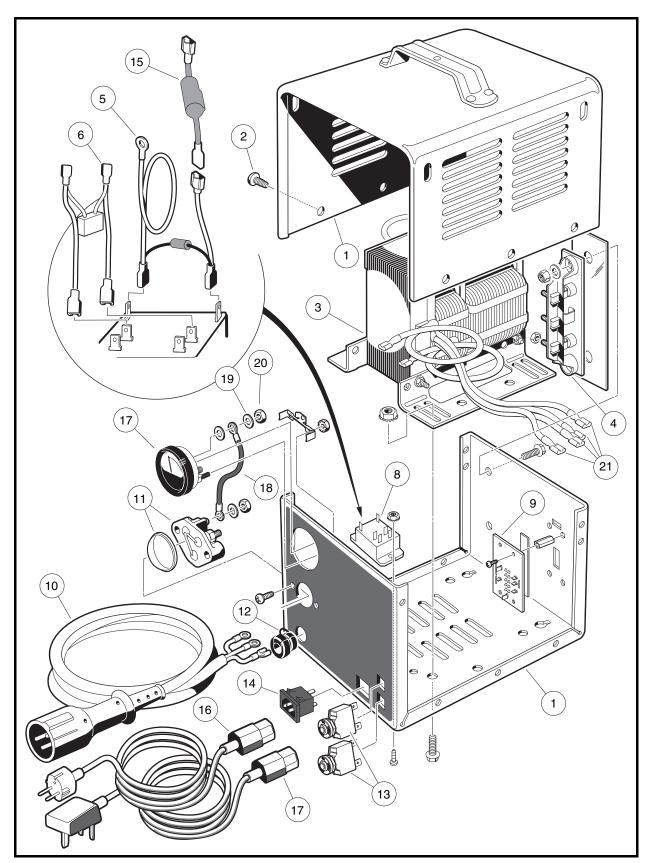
IQ Plus Battery Charger (Export) – Exploded View
